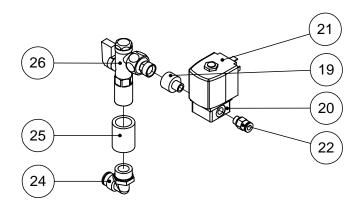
EXPLODED VIEW VS11 DRYER MODULE
